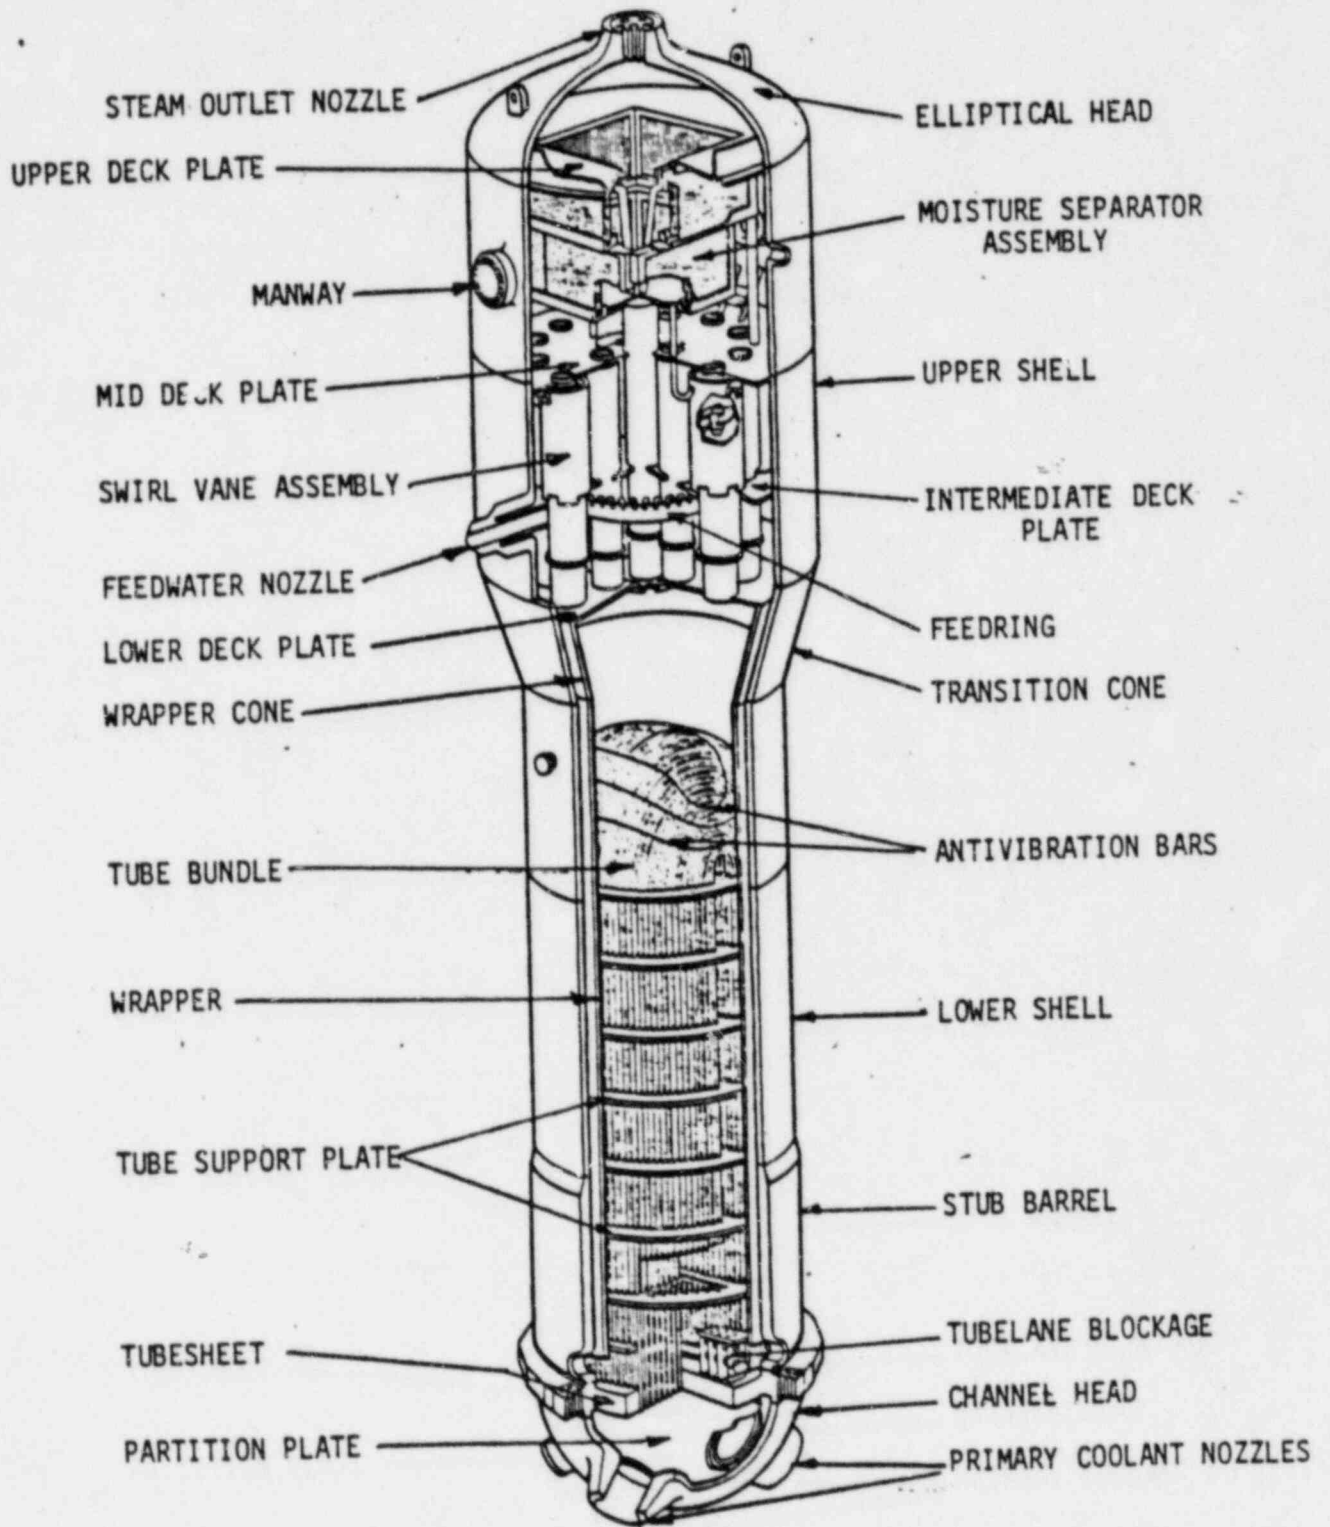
CUTAWAY VIEW OF A MODEL F STEAM GENERATOR
